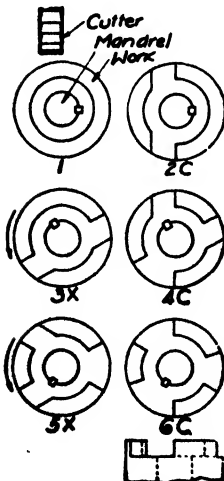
Sequence of Operations in Milling a Three-tooth Straight Jaw Clutch.
